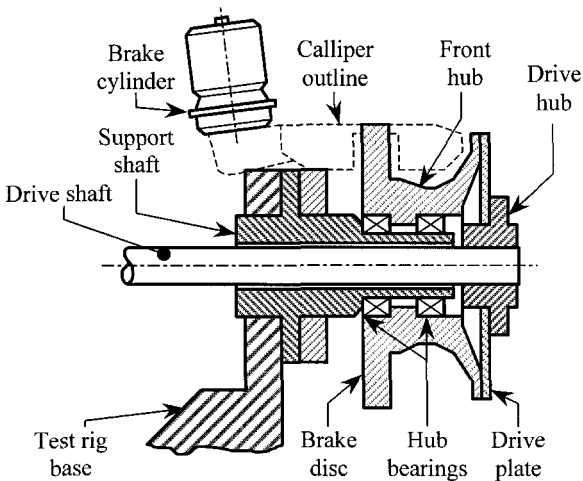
Mounting of Driveshaft to front wheel assembly.
